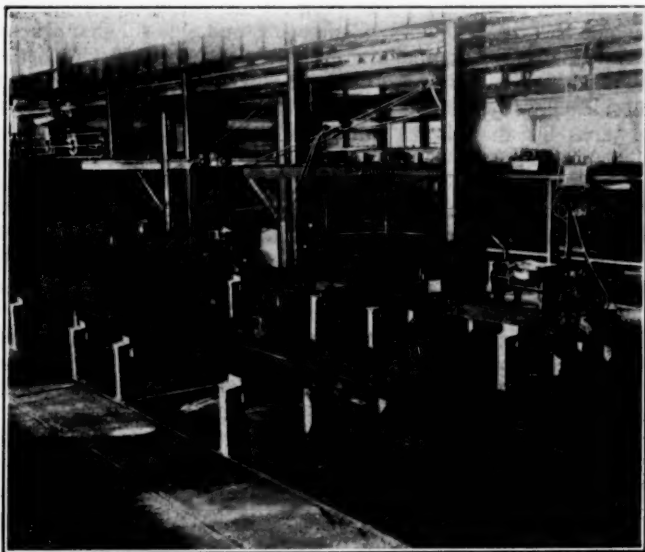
JIGS USED IN ASSEMBLING UNDERFRAMES
